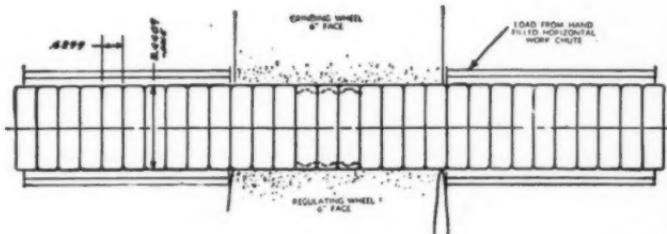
These outer bearing races are loaded into a Landis machine while previously loaded races are ground by the thru feed method to .0002" for roundness and straightness, and with O.D. square with sides to .0005". Production for both rough and finish is 3800 per hour.
